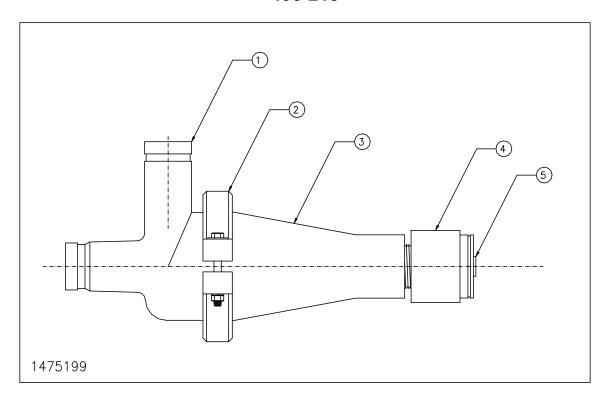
4" CTX CONE ASSEMBLY 406-218-U
